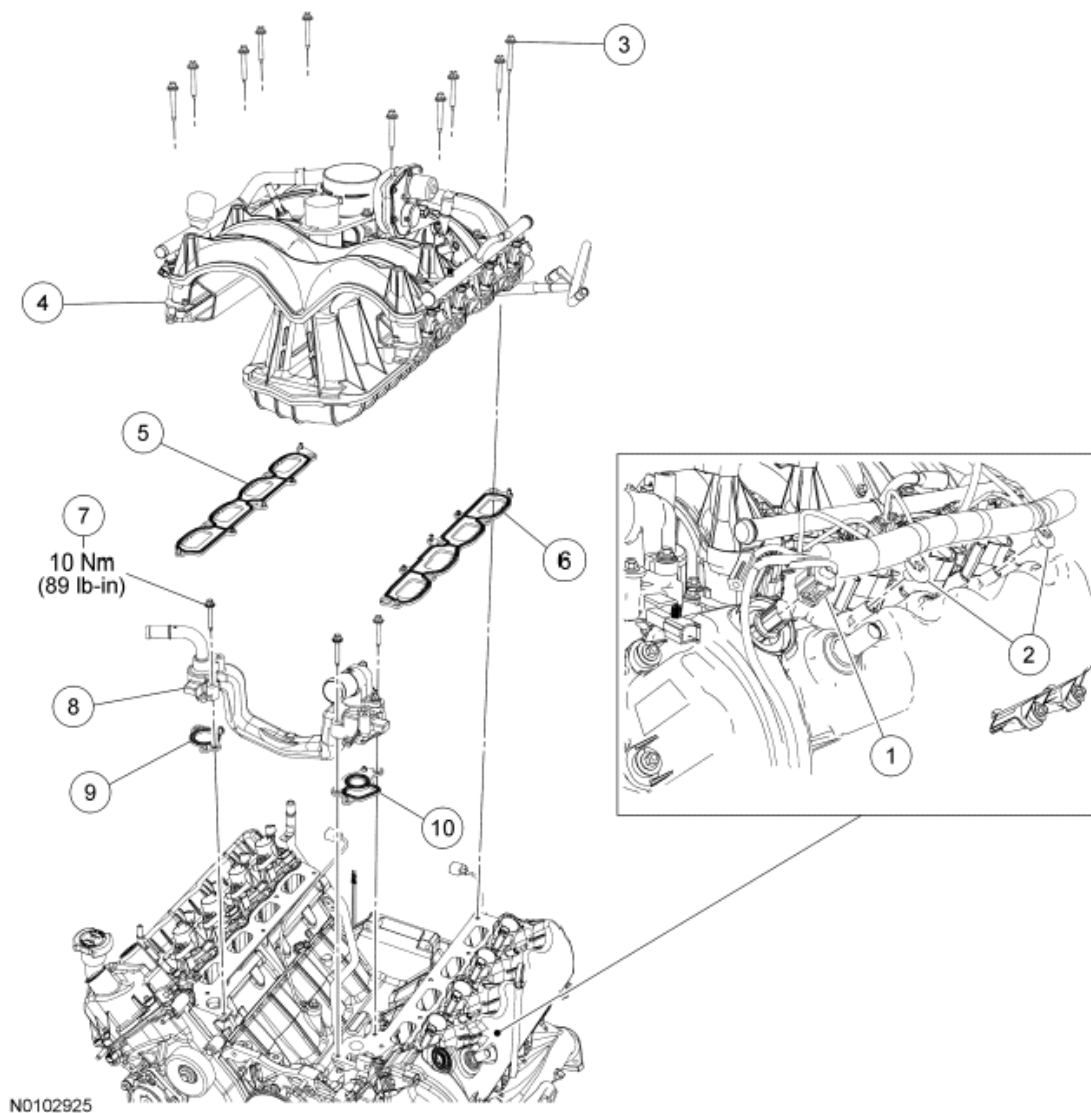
Identifying Intake Manifold, Coolant Crossover Manifold Assembly And Gaskets Components With Torque Specifications
